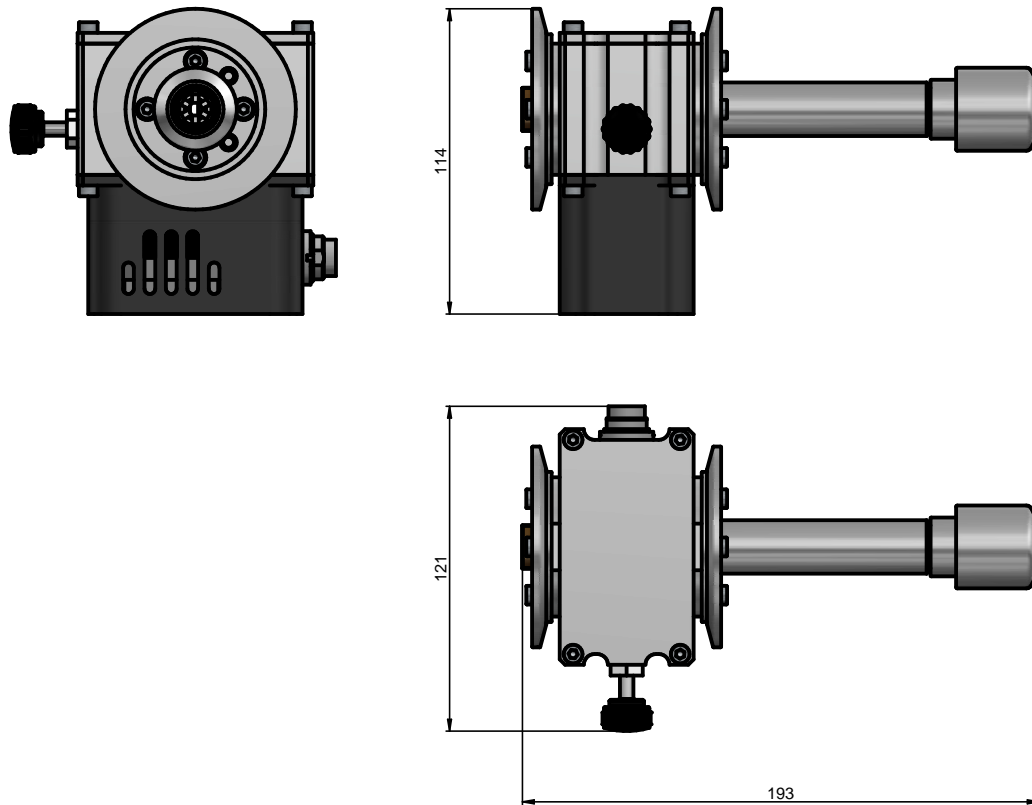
Dimensions of the Multi Rod Feeding System - MRFS [mm]
